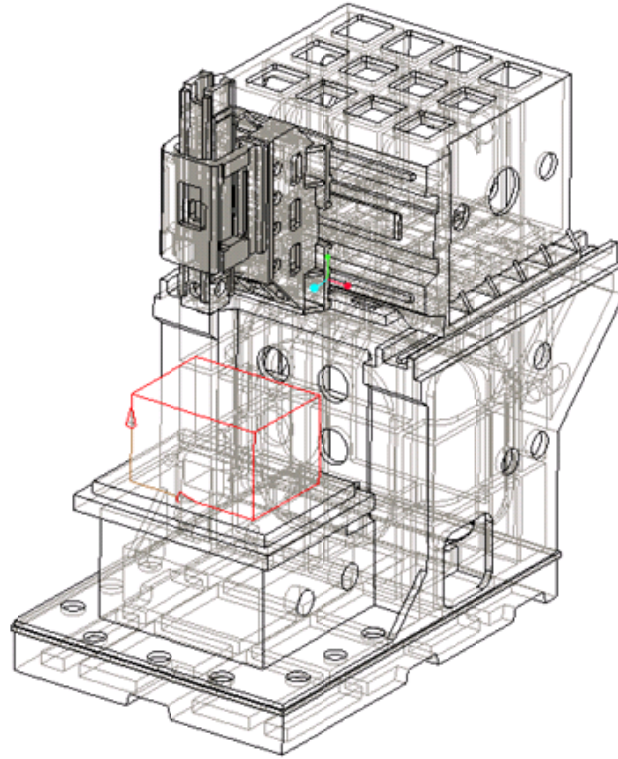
CAD model of Sodick AQ55L EDM machine (Courtesy of Sodick Inc.).
